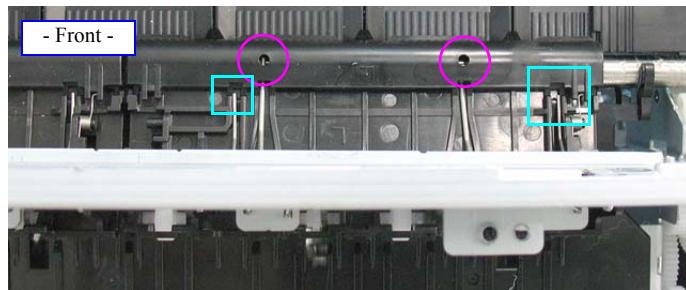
Installing the Left and Right Upper Paper Guides (2)
